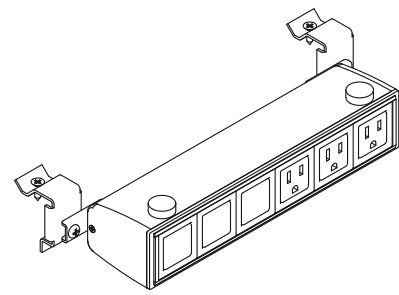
Rail Mounted Electrical Component for Tables (3+3 shown)
